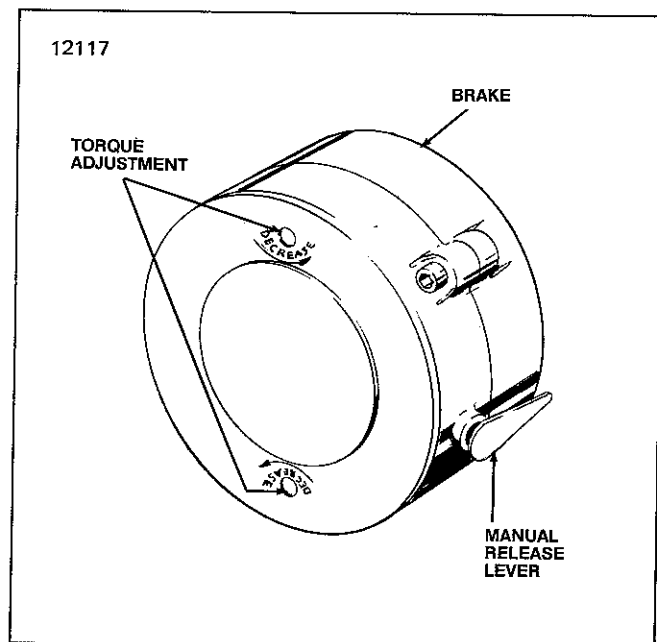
Typical Magnet Disc Brake Torque Adjustment.
